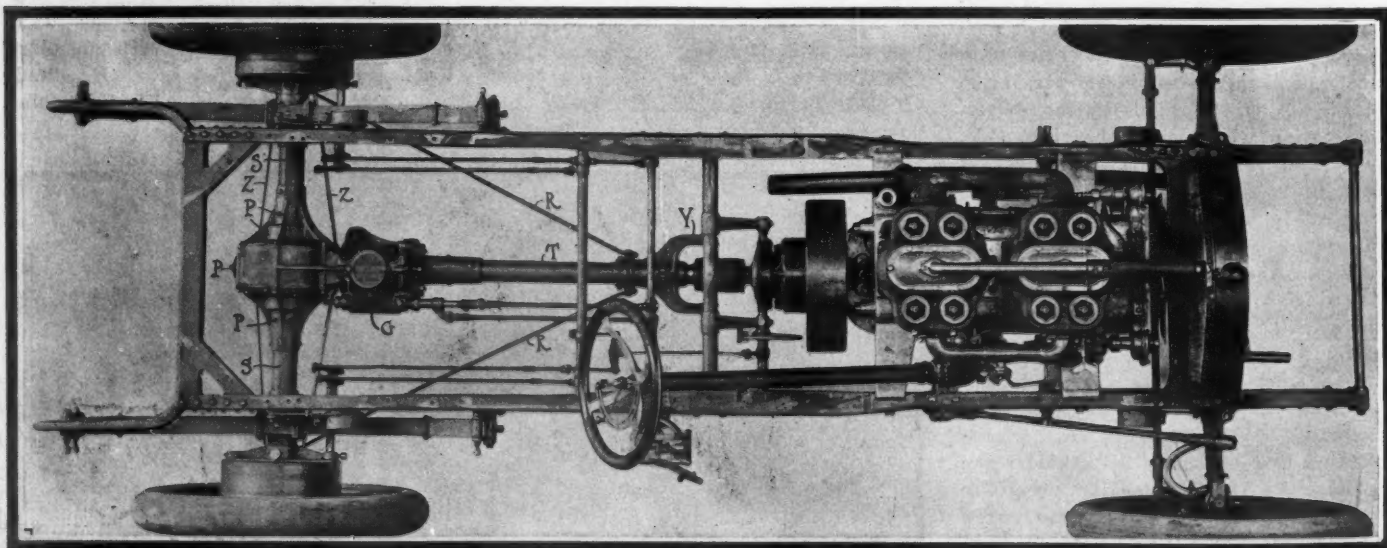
PLAN OF STUTZ CHASSIS WITH INTEGRAL GEARSET AND REAR AXLE; ALSO TORSION TUBE T AND REINFORCING RODS R
